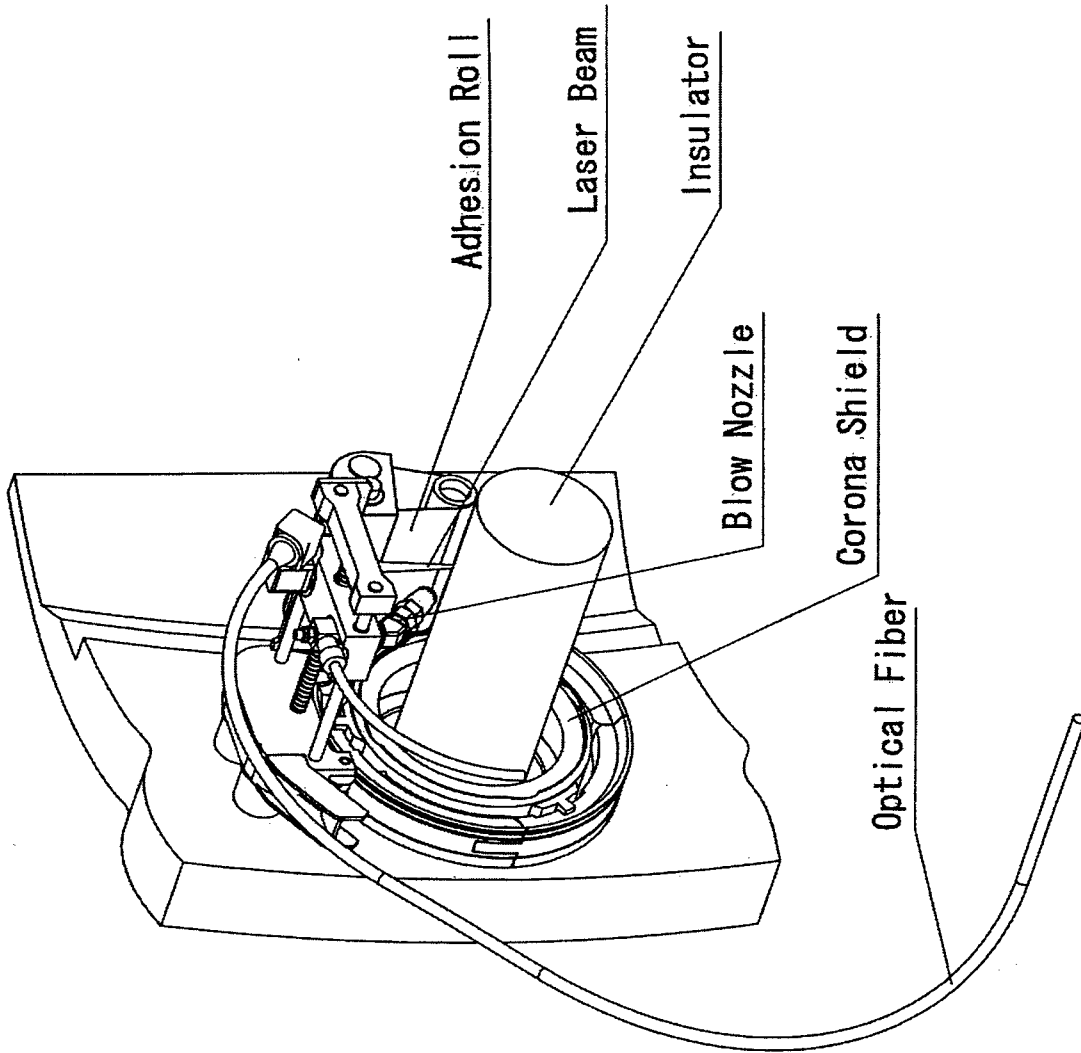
Cesium Cleaning Tool (Adhesion Type)
